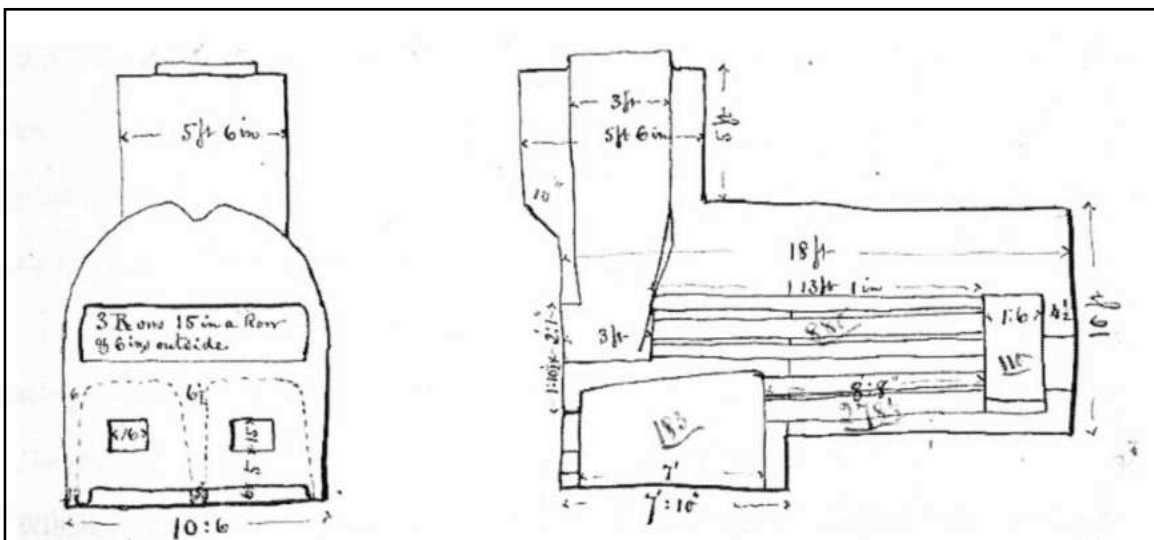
Boiler drawing for the *James Gray* built in 1857 (Mariners Museum MS102 Folder 5 211).
